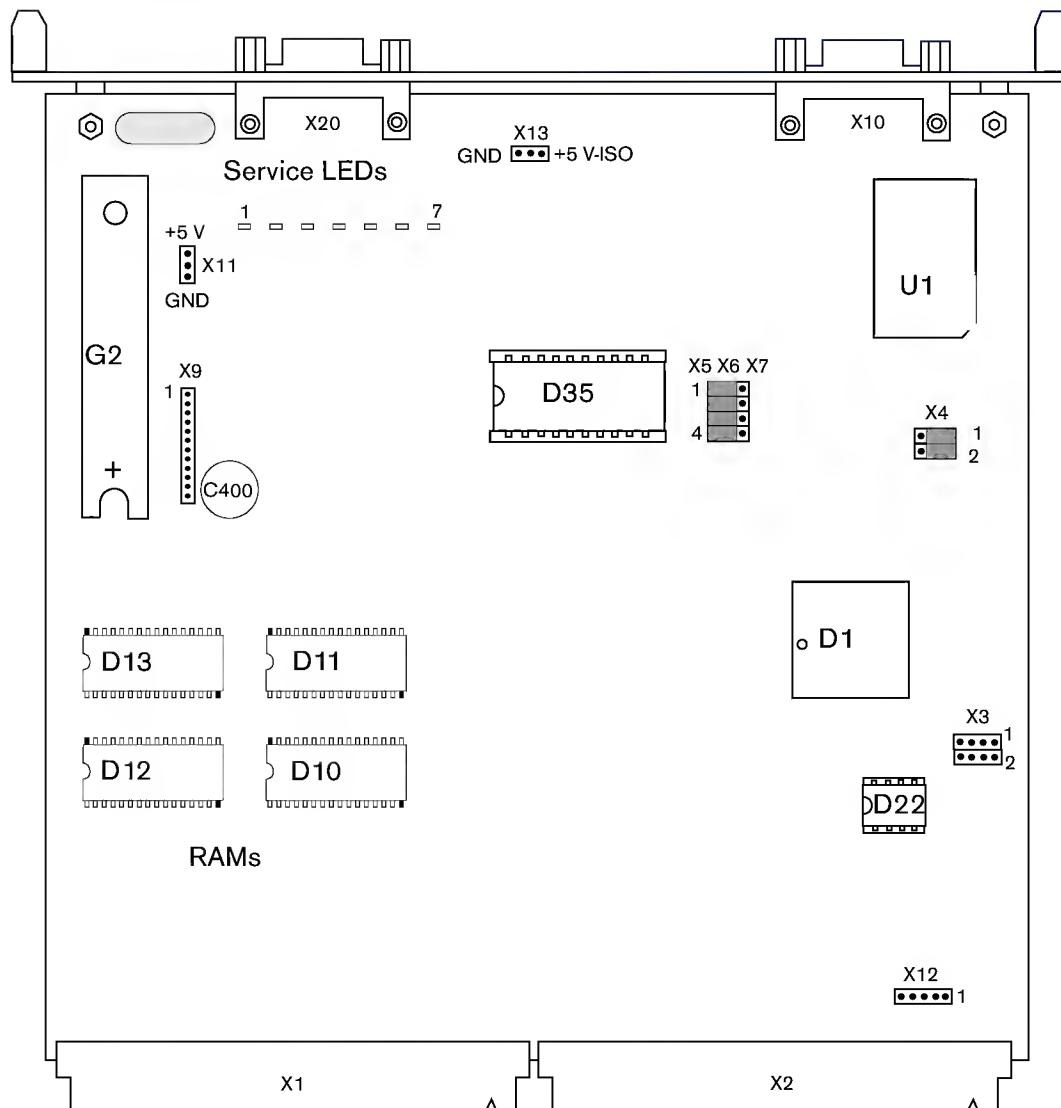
Components mounting diagram of the CPU 68332 PCB
